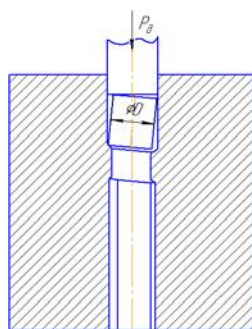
The scheme of the compressor blade workpiece extrusion process
